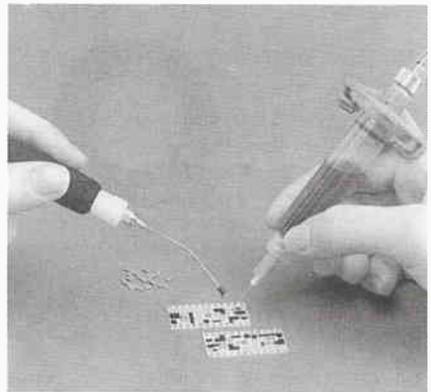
IT TAKES TWO HANDS to position an SMD device on a PC-board: one for the cream dispenser, the other for the vacuum holder.
